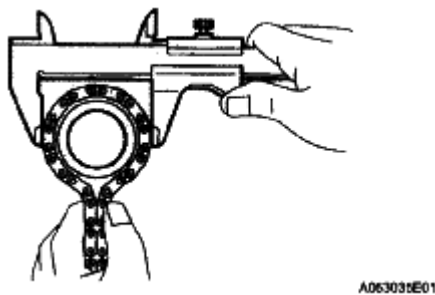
Inspecting Crankshaft Timing Gear
